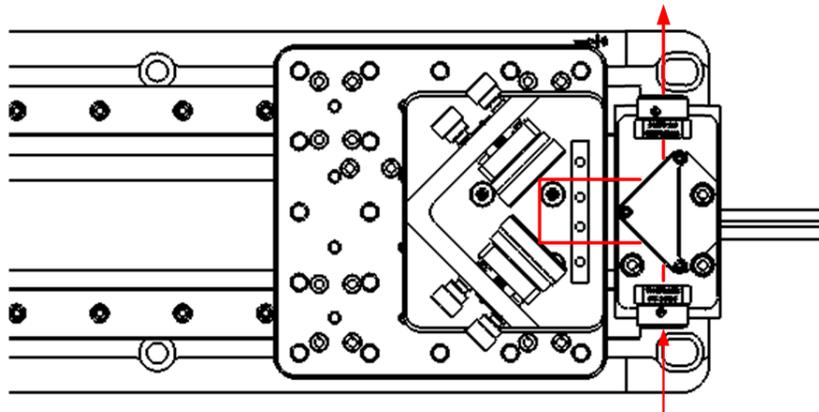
Mounting the Stage Riser and Knife-Edge Prism
